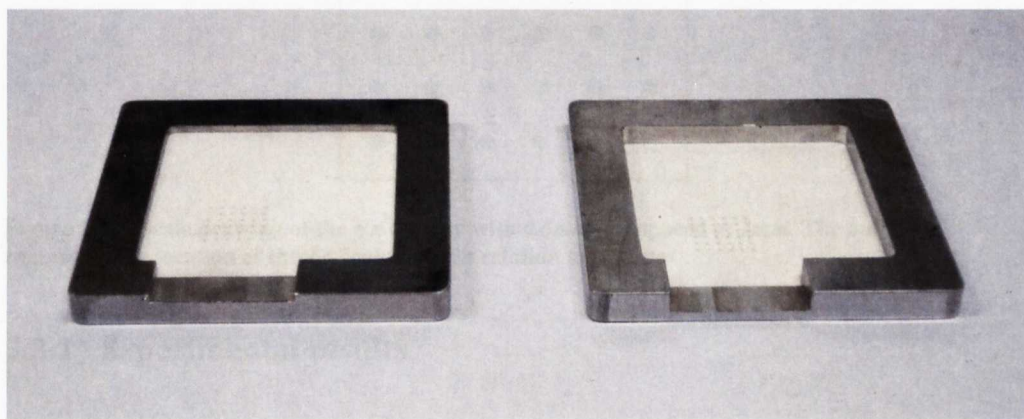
Test pieces A (left) and J produce a jet-to-target distance of 0.41mm and 3.96mm respectively. Each alumina sprayplate is identical, a recess machined into the aluminium holder determines the jet-to-target spray distance (H). The spent fluid exhausts through the 24mm wide exit channel.
